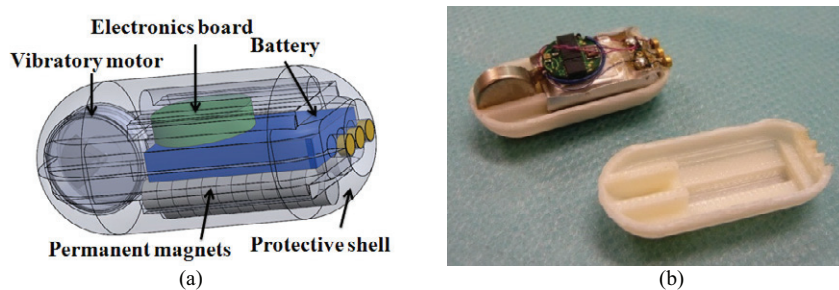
(a) Computer-aided design model of the vibrating capsule, indicating its main components, and (b) assembled capsule prototype.
